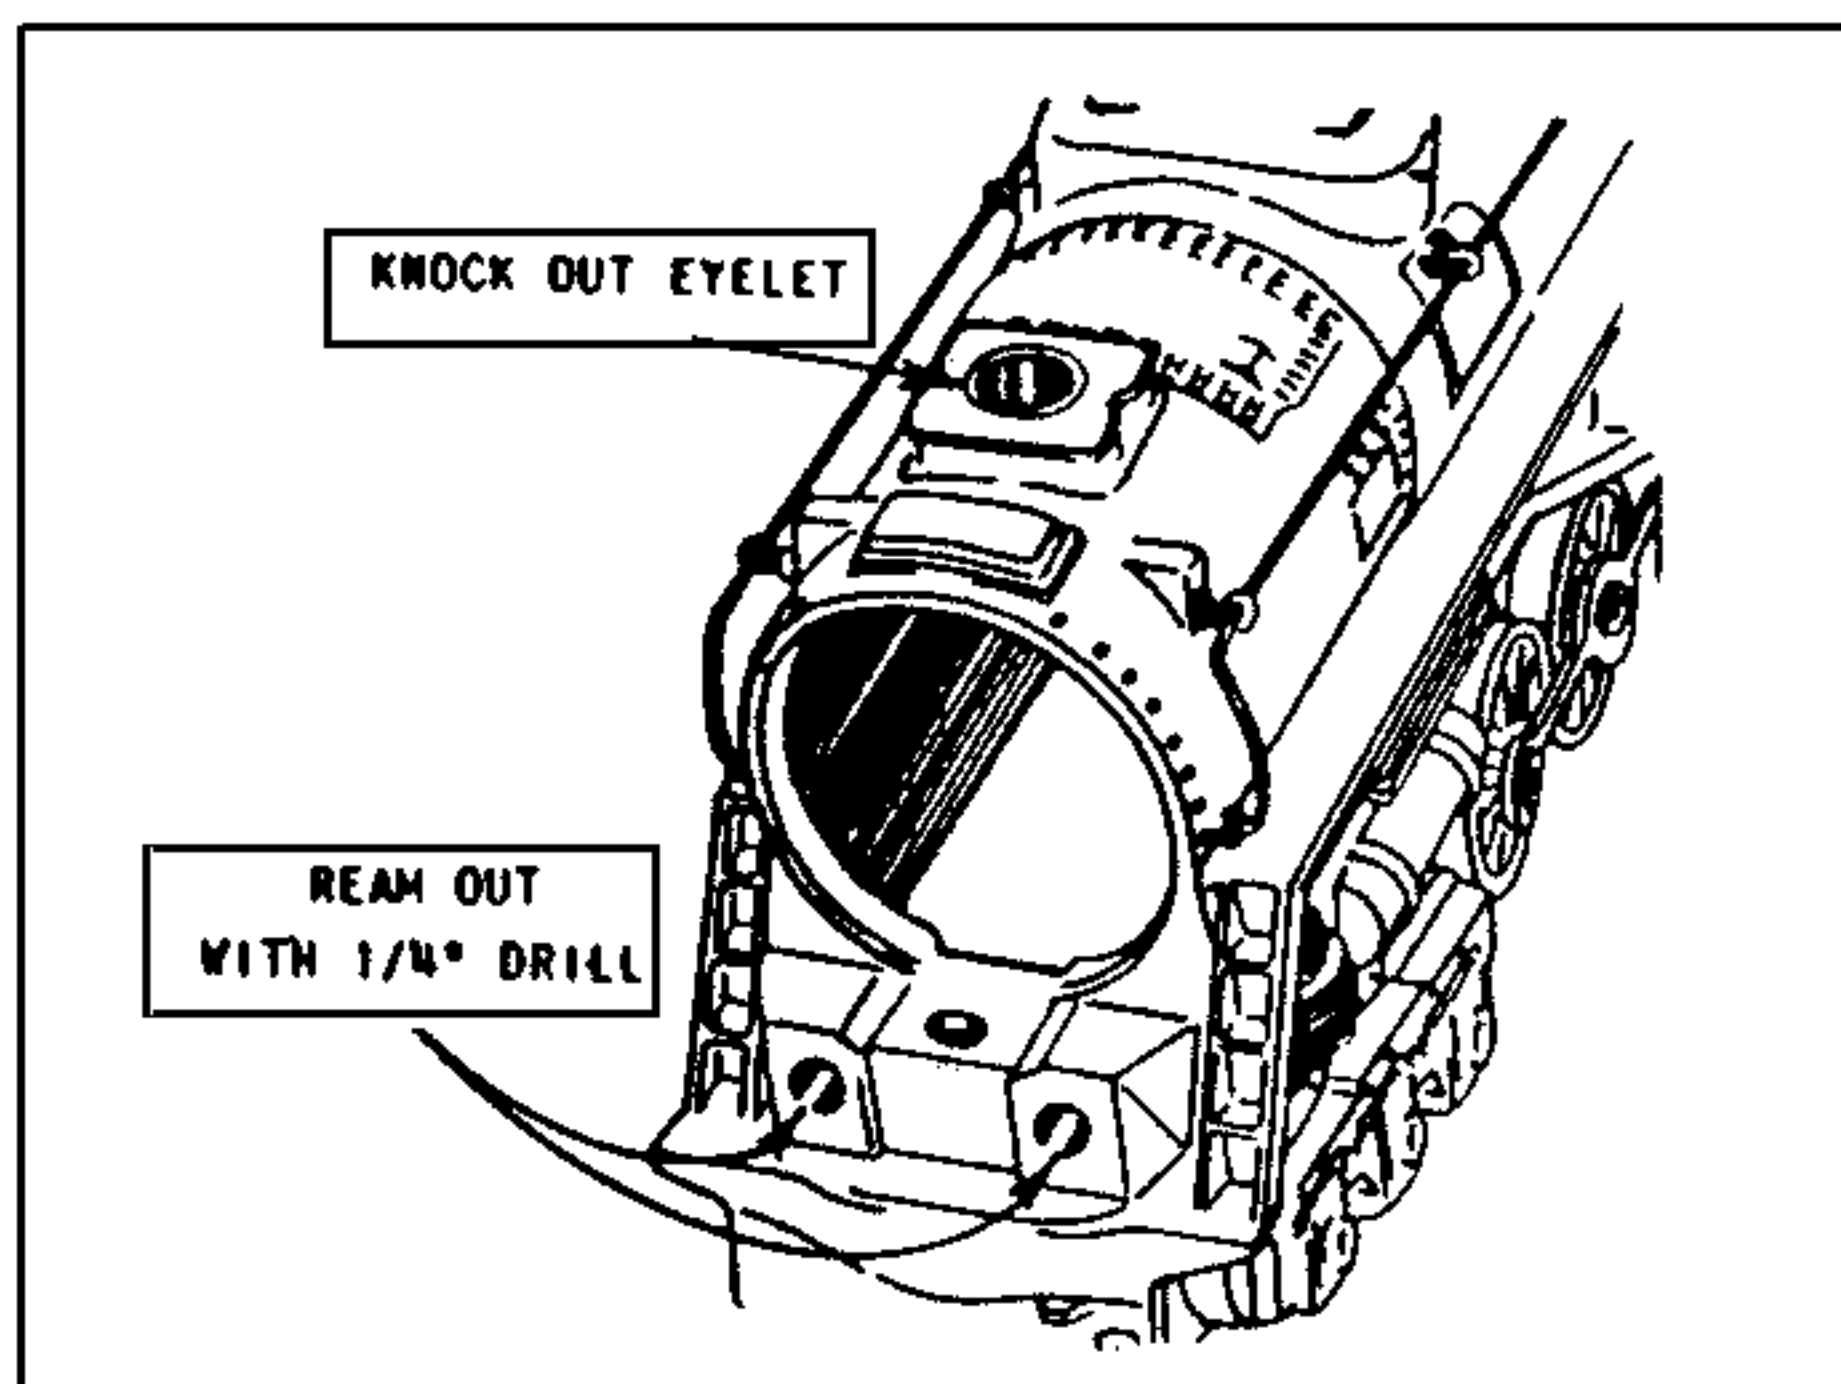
How to adapt locomotive casting to heater-type smoke generator.
